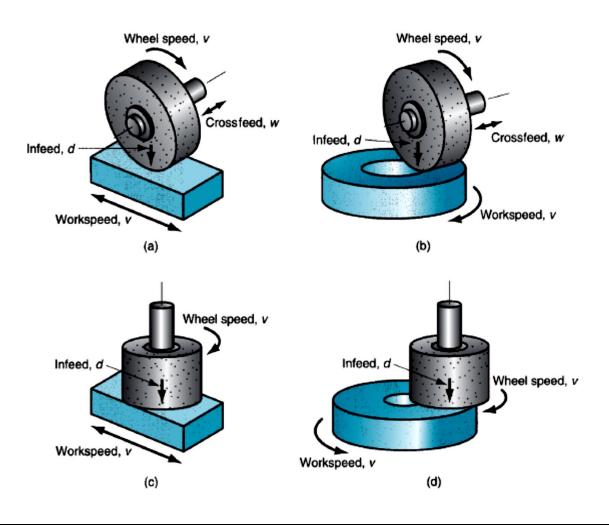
four types of surface grinding: (a) horizontal spindle with reciprocating worktable (b) horizontal spindle with rotating worktable (c) vertical spindle with reciprocating worktable (d) vertical spindle with rotating worktable
